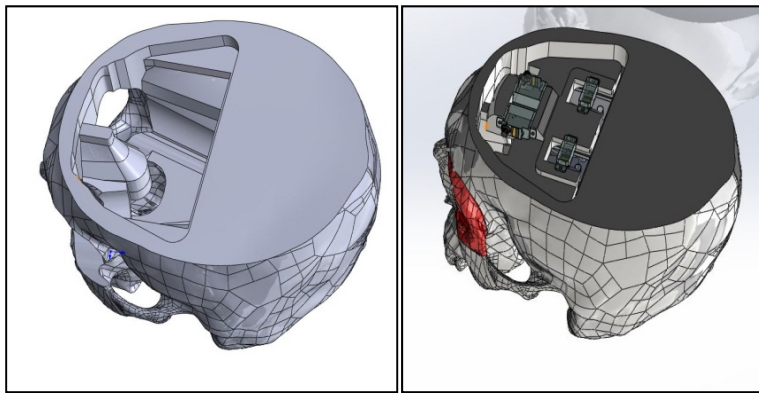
Partitioning of skull; skull component with motion cavity shown; assembled skull design with mechanism.
